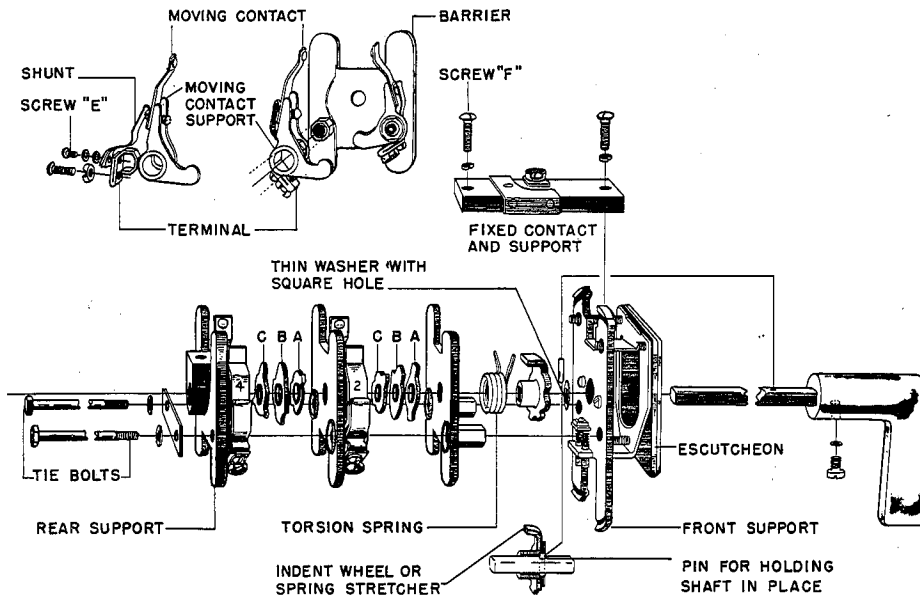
Exploded View of Contact Section of Type HEA Relay
